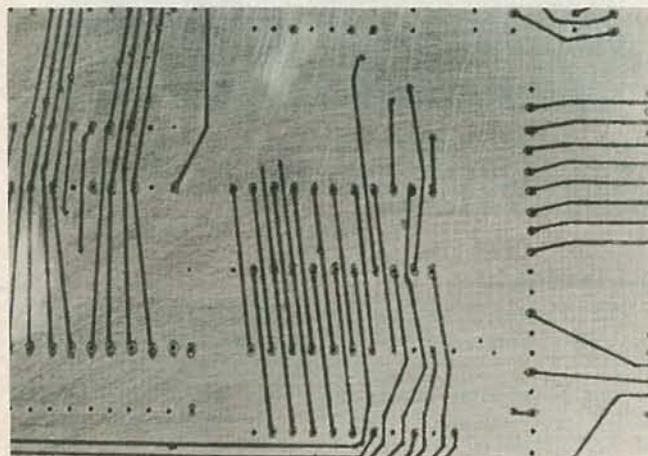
WHEN DRILLING A SMALL BOARD, a piece of perforated construction board with 0.1-inch spacing makes an excellent drilling guide.
